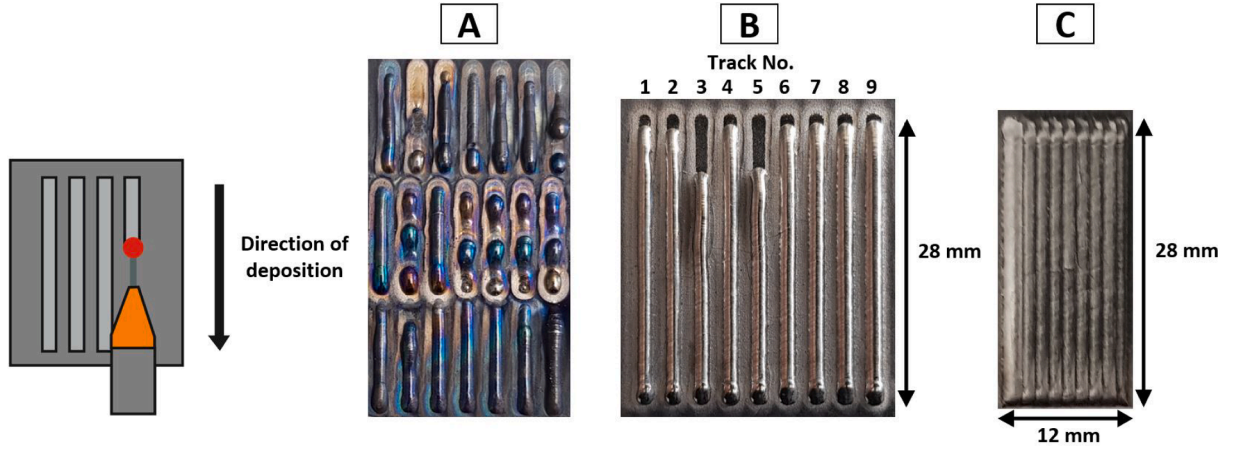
Images of LMD-w welding beads and a layer. (A) showing preliminary investigation samples, which contain various defects. (B) is displaying 9 of the overall 45 welding beads generated for the parametric study to optimize the creation of single welding beads. (C) is an LMD-w layer covering an area of $28 \times 12 \text{ mm}^2$, which was deposited with the process parameters listed in Table 3.
